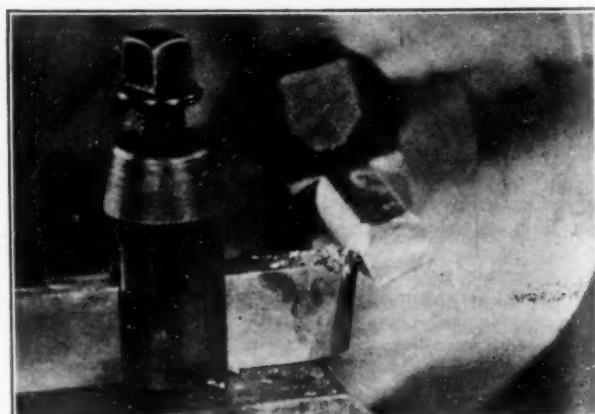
CUTTING A HIGH SPEED STEEL CUTTER IN A LATHE WITH "CARBOLOY"
